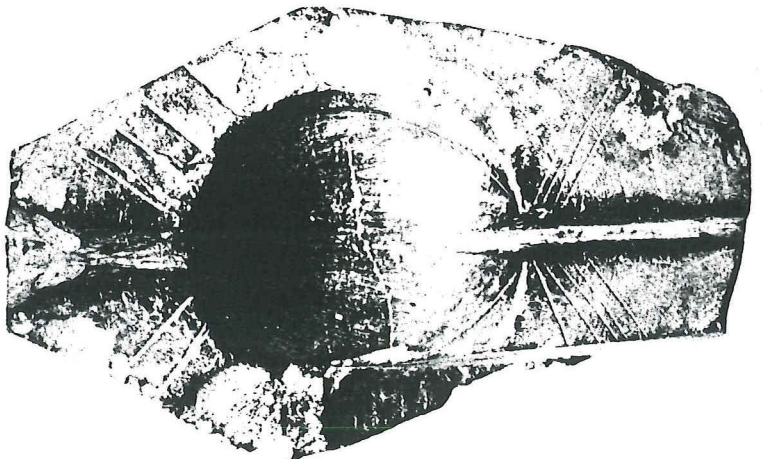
Plan view of the mould fragment showing the spoon-shaped recess, pouring gate, facing marks and vent grooves.
